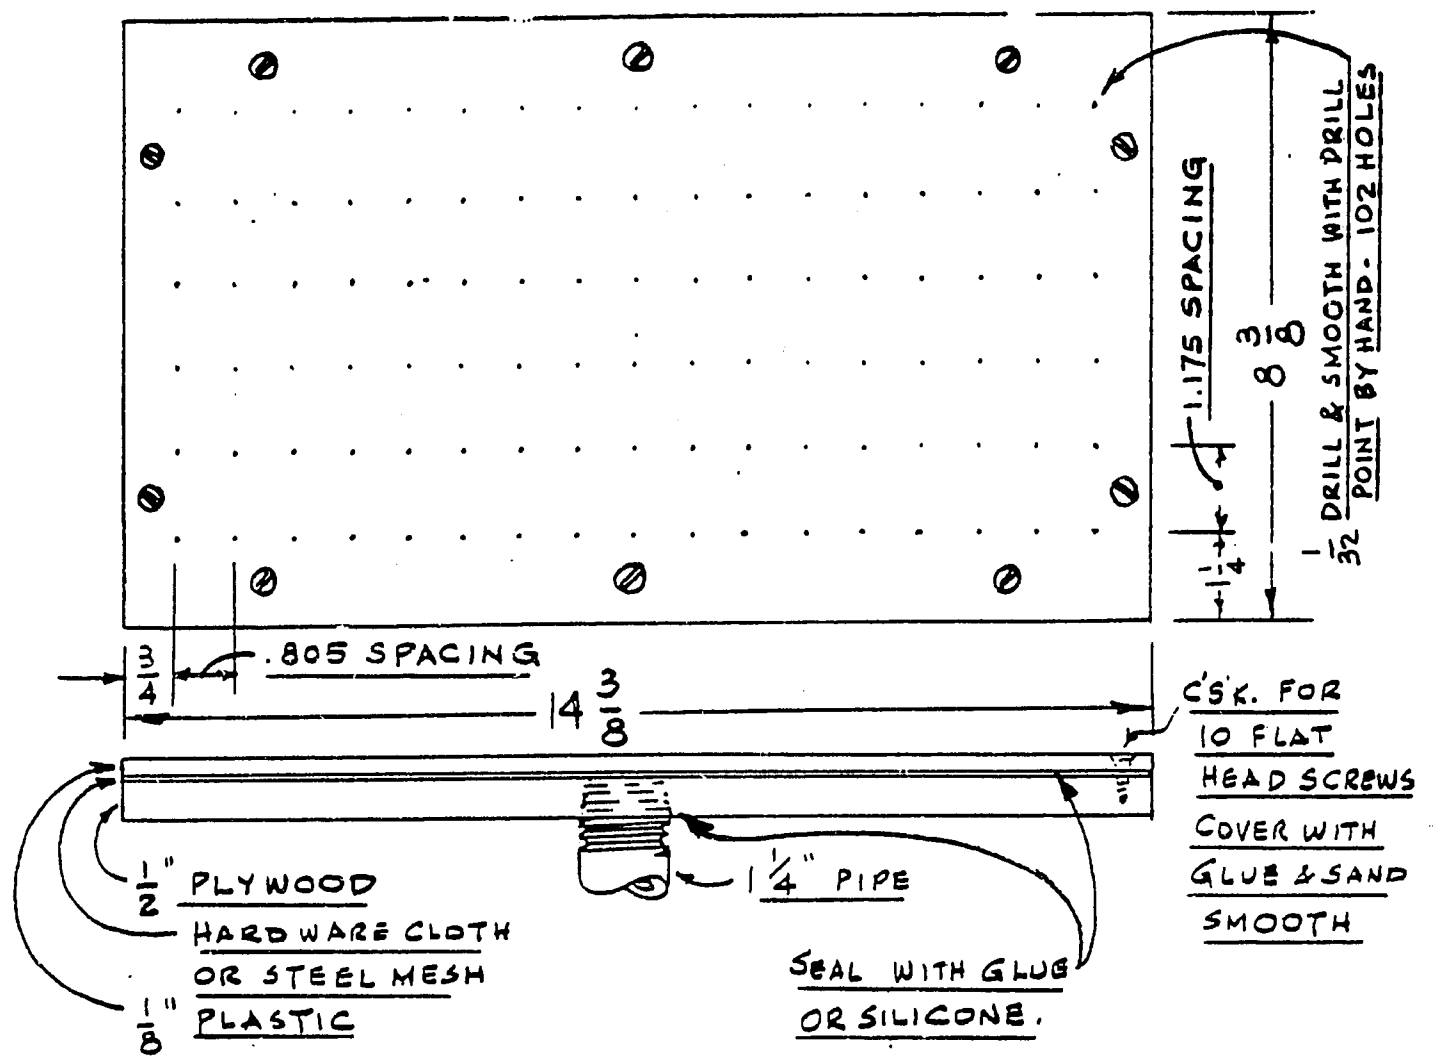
PLAN OF VACUUM HEAD SEEDER
